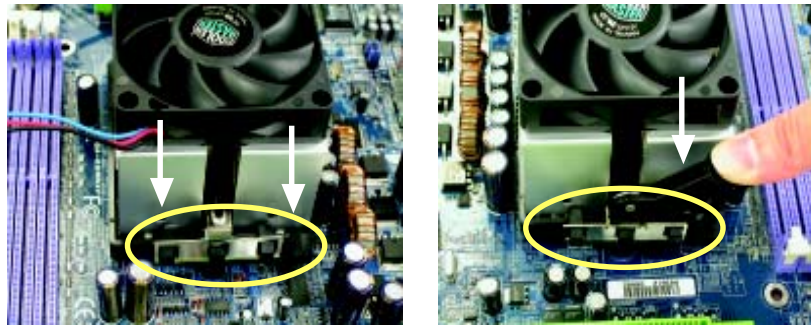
&6 Alignment of Heatsink Assembly with Standoffs
